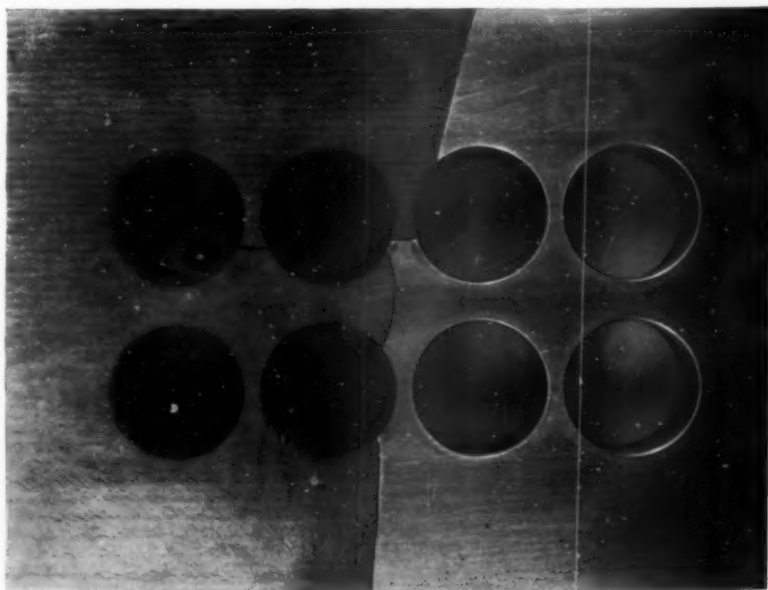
Moulding die which broke in service. Left hand piece has been etched to show serious cracking.
